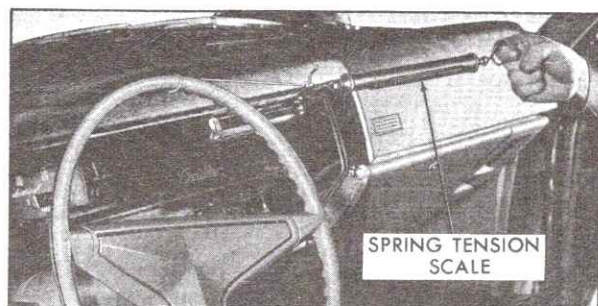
Checking "Off-Center" Pull of Wheel
